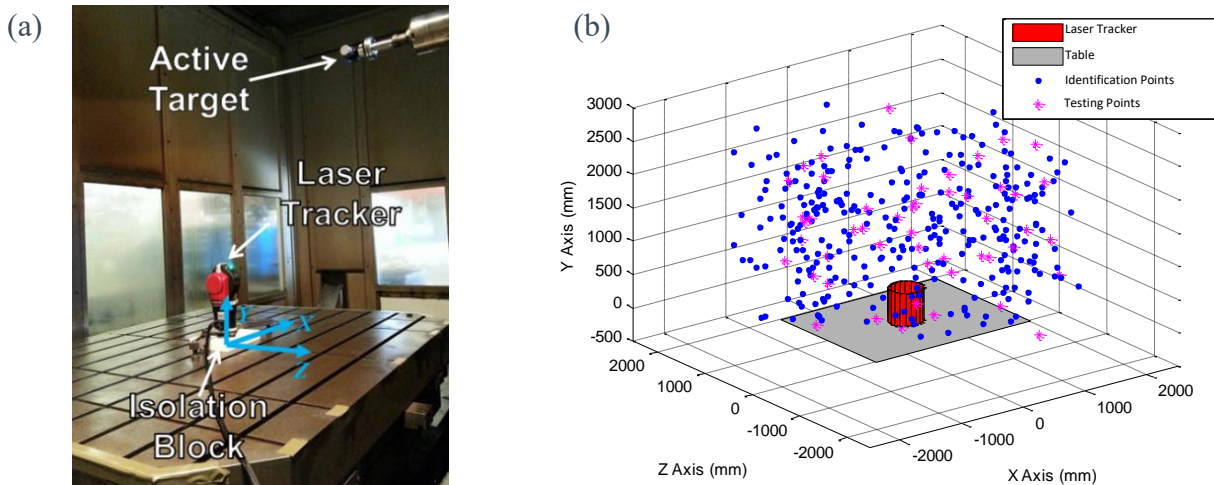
Machine tool work cell and table base frame; (b) Positions of identification and testing points inside working envelop, given in machine tool base frame.
